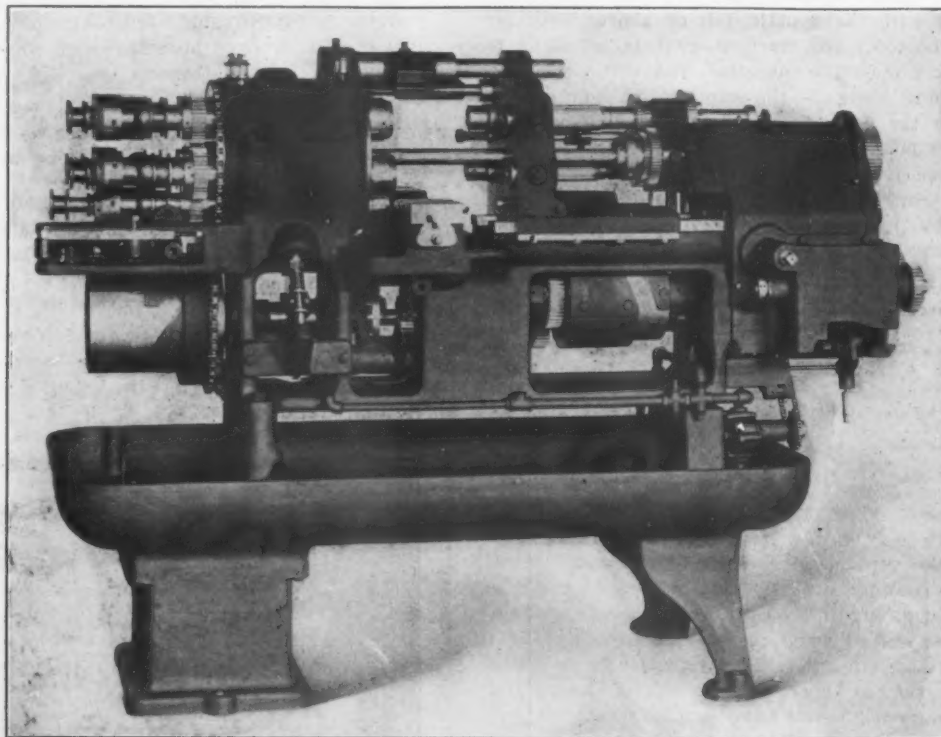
The Improved Automatic Multi-Spindle Screw Machine Built by the Peerless Automatic Machine Company, Cleveland, Ohio.
